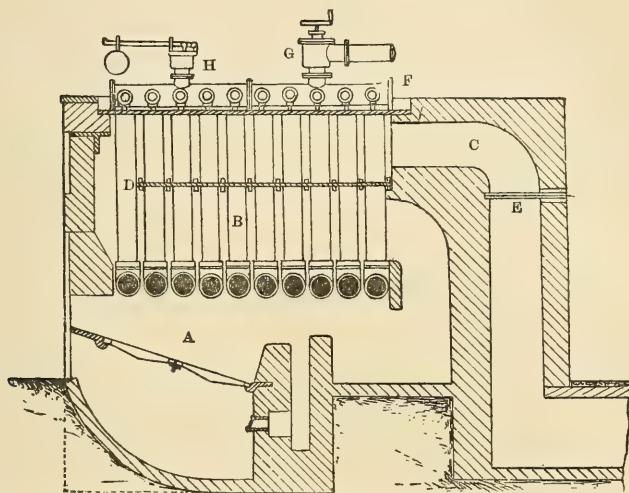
Water-tube Boiler. A, Furnace. B, Tubes. C, Flue. D, Division plate. E, Damper. F, Steam receiver. G, Stop valve. H, Safety valve.
